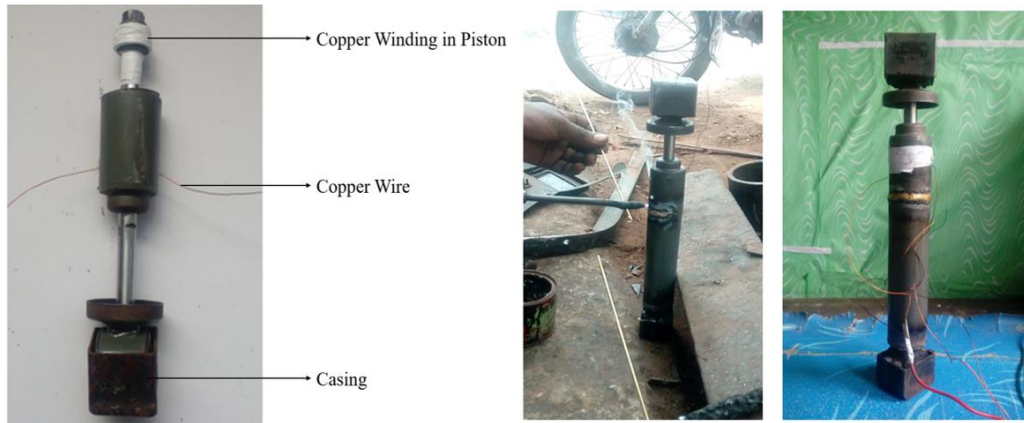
Copper winding in piston and attached casing (Left), Gas Welding of MR damper (Middle), Final Finished MR damper (Right)
